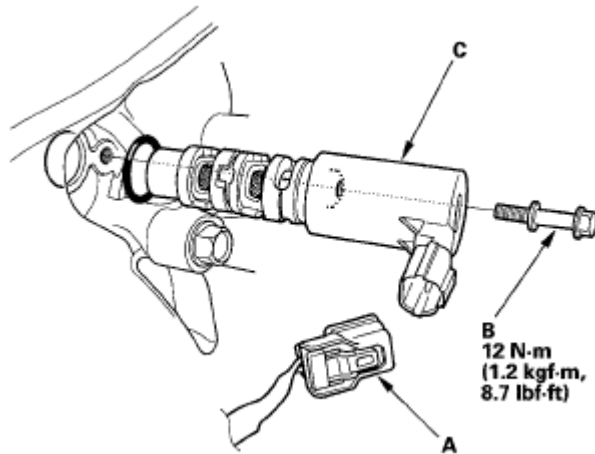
Identifying VTC Oil Control Solenoid Valve Connector, VTC Oil Control Solenoid Valve And Bolt With Torque Specification
